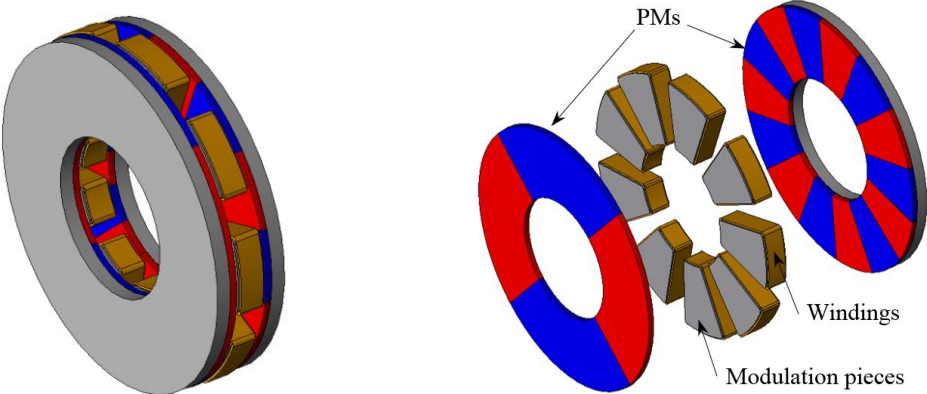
Magnetic geared machine presented in [ZAY14].
